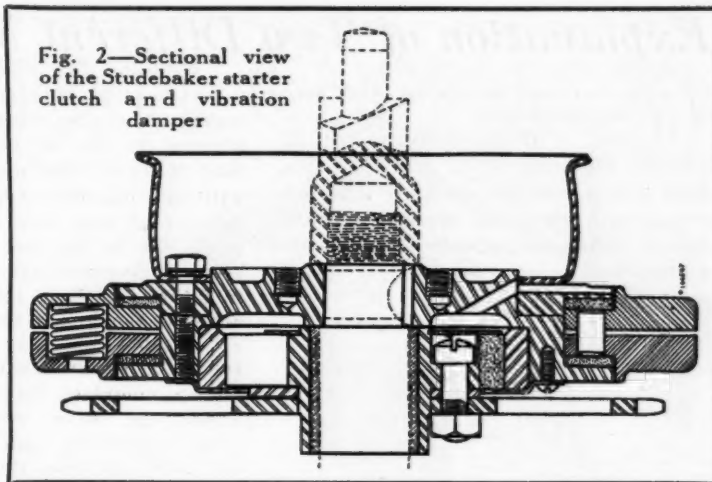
Sectional view of the Studebaker starter clutch and vibration damper
